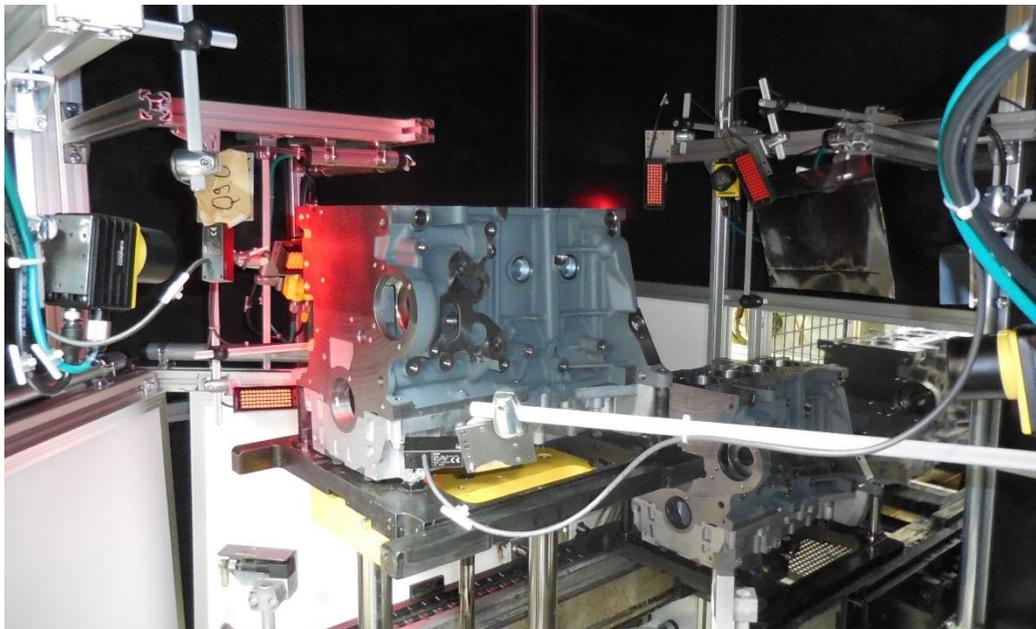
Final control on the machining line for the Diesel engine's body: The vision system
